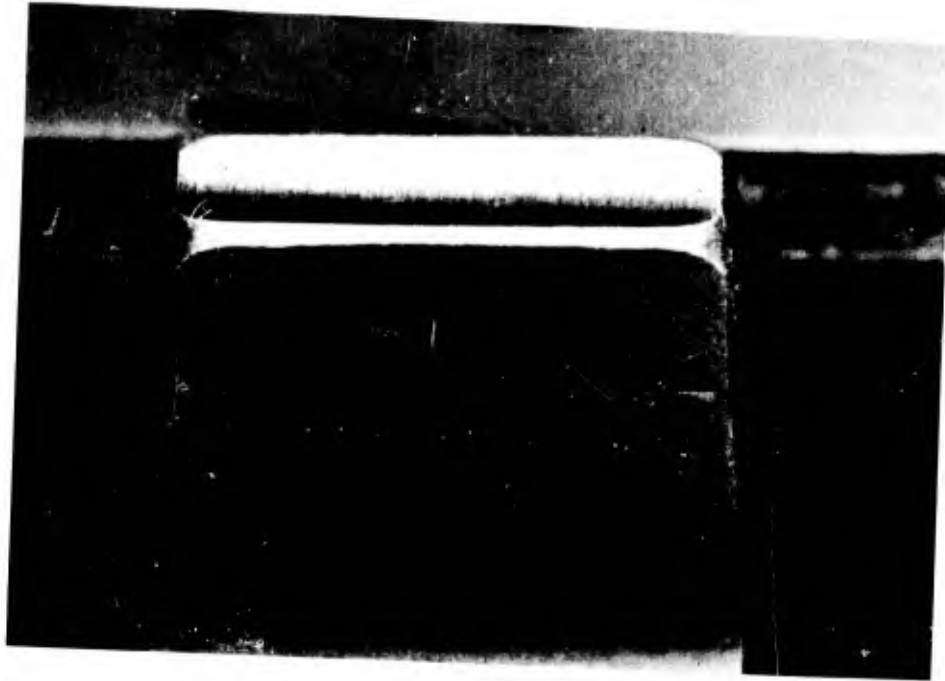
Tooth No. 24 of VASCO-X2 Steel Test Gear (SK21988, Serial No. 1, Side A, as received)
